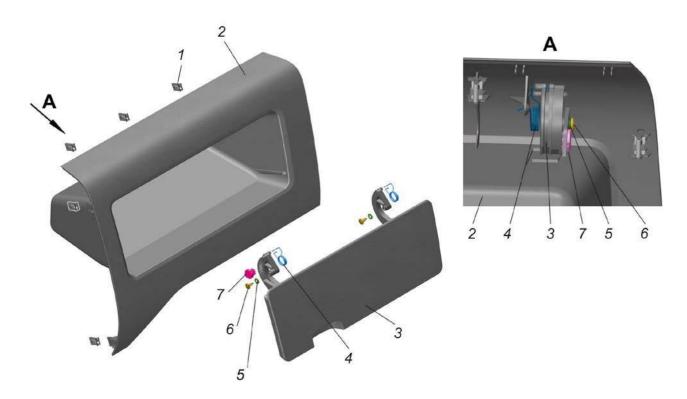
Upper glove compartment with door: 1 – spring holder; 2 – upper glove compartment; 3 – door¹); 4 – spring; 5 – nut; 6 – screw; 7 – brake
